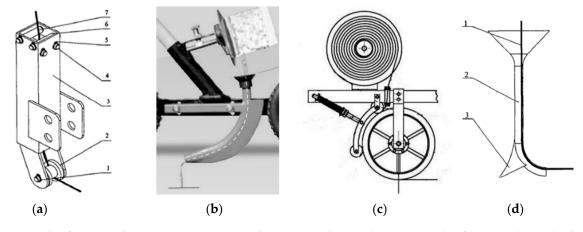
Kinds of tape guiding system. (a) Tape guiding system designed by Lv, 1. Axle of tape guiding wheel 2. tape guiding wheel 3. Shell 4. Axle of tape guiding pipe 5. Gasket 6. tape guiding pipe 7. Seed tape [84]; (b) Knife guide tape opener (https://www.sedos.sk/Data/1049/UserFiles/SEDOS%20Catalogue%202012%20ENG.pdf (accessed on 8 October 2021)); (c) Press-in tape guiding mechanism [88]; (d) Core-drawing tape guiding opener, 1. Seed tape 2. Tape guiding pipe 3. Furrower [82].
